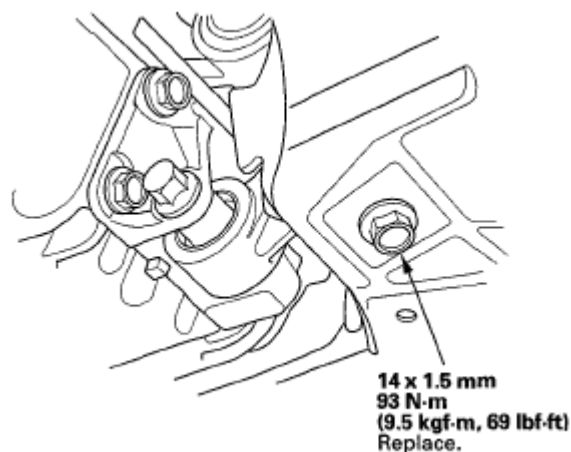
Identifying Lower Torque Rod Mounting Bolt w/Torque Spec.
